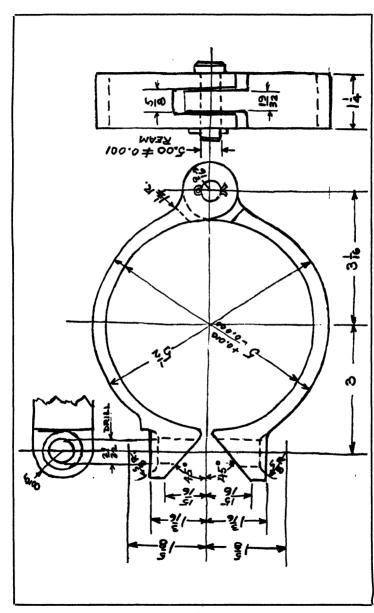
A Propeller Blade Clamp-ring. This is a Pencil Sketch Drawn Upon Smooth Paper which is the Reason Why the Lines of this Reproduction are Darker than Those of Sketches Like Figs. 20 and 22
